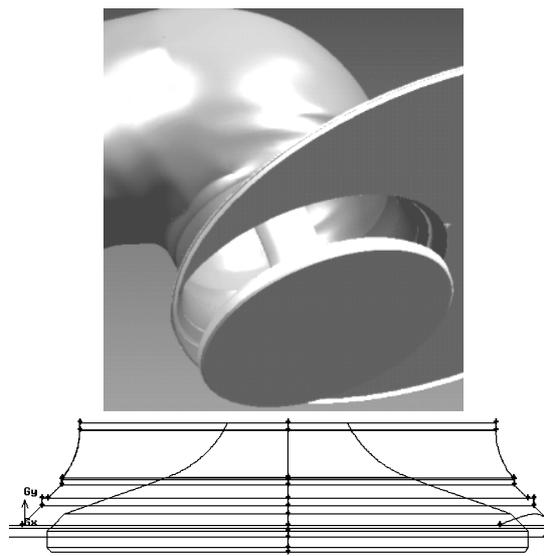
Details of the cylinder and the inlet manifold of the D909 engine.
